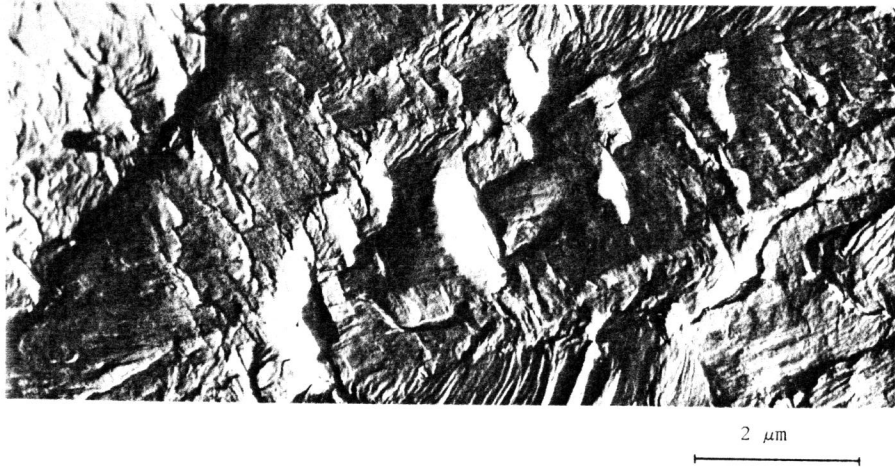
Plastic-carbon replica of the fatigue fracture surface. Mainly brittle mode of fracture.
